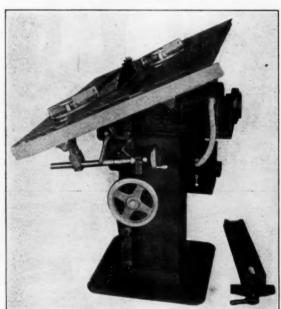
Single-Arbor Tilting-Table Saw-Motor on Saw Mandrel
